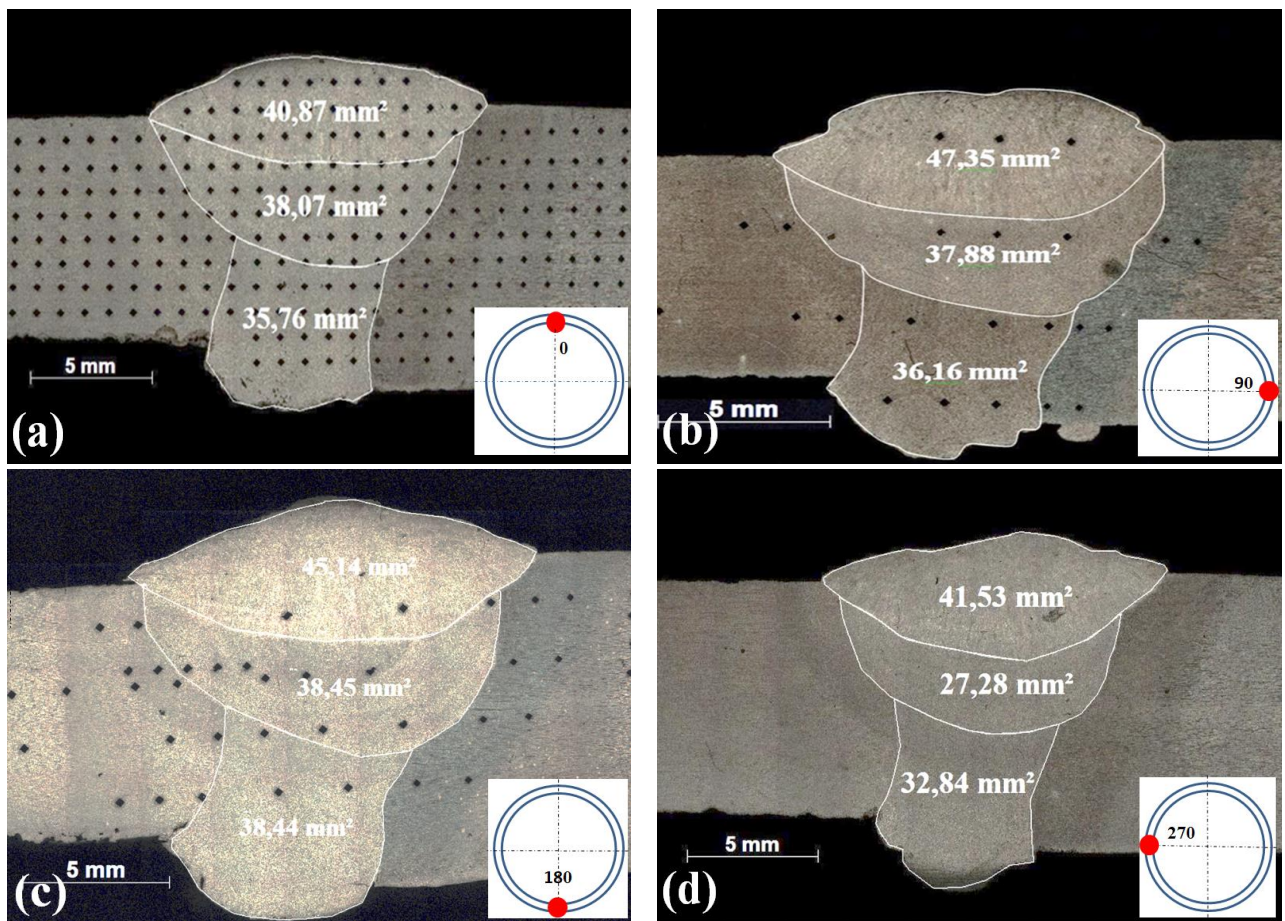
Weld bead profile at different poistion (a) 0° (b) 90° (c) 180° (d) 270°
